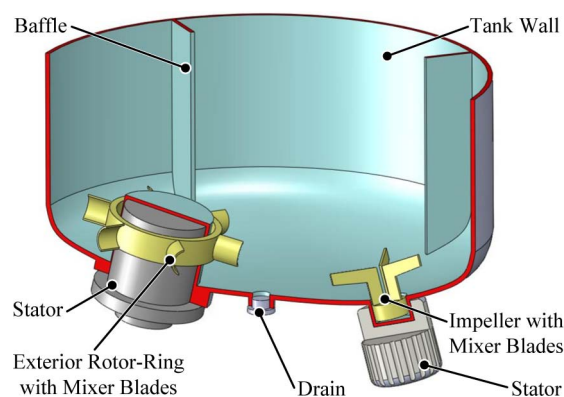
Principal implementation of a bearingless motor in a stirred vessel: On the left side, a bearingless motor with exterior rotor (preferred design) is shown, and on the right side, a bearingless motor with interior rotor is depicted.
